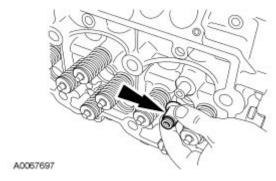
Installing Valve Stem Seal Courtesy of FORD MOTOR CO.
